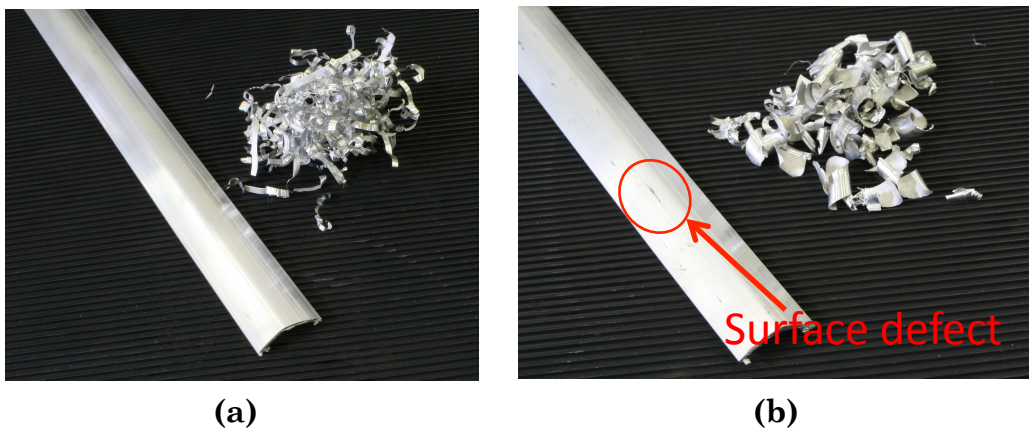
Decorative car bright trim extruded from (a) AA6060 extrusion saw trimmings (b) AA6061 aerospace machining chips
